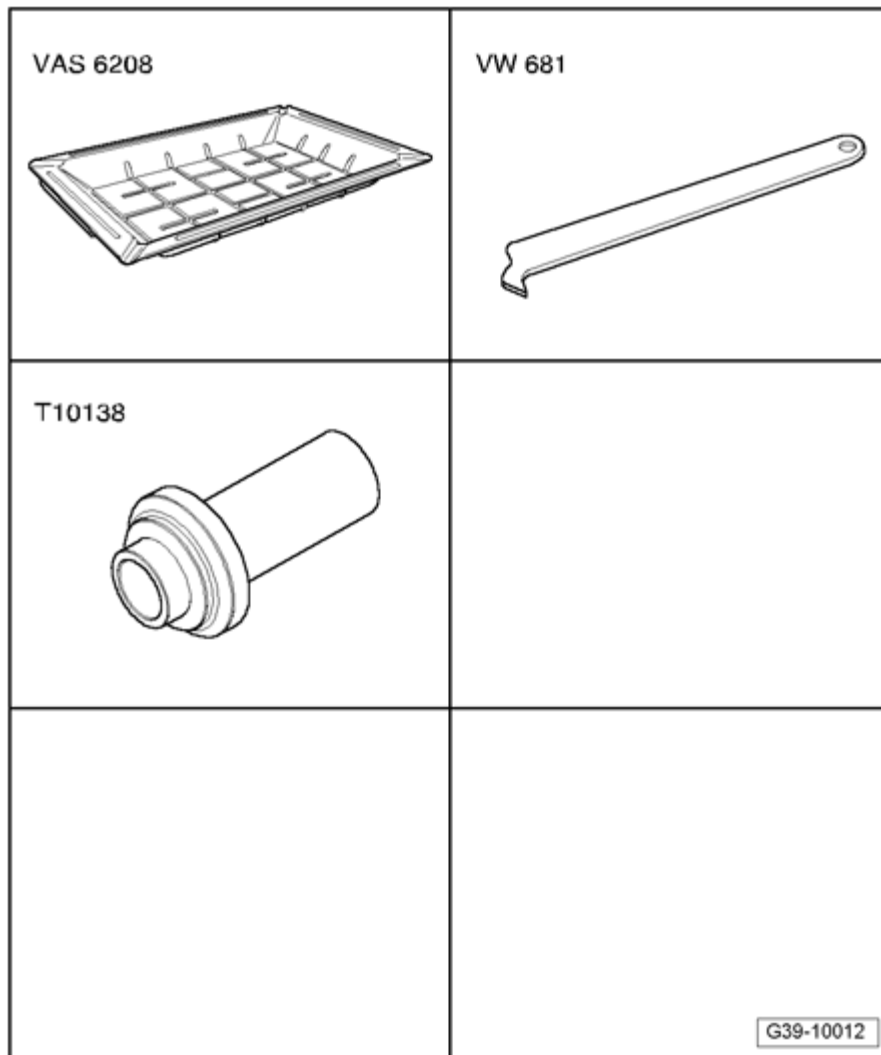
Identifying Special Tools - Flanged Shaft Oil Seal (Right Side), Replacing
